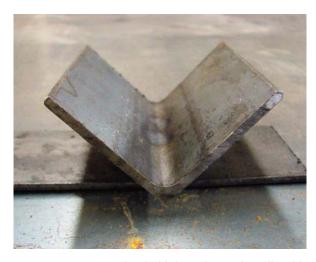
Jig used to hold the cube so that all welds can be done in the flat position.
